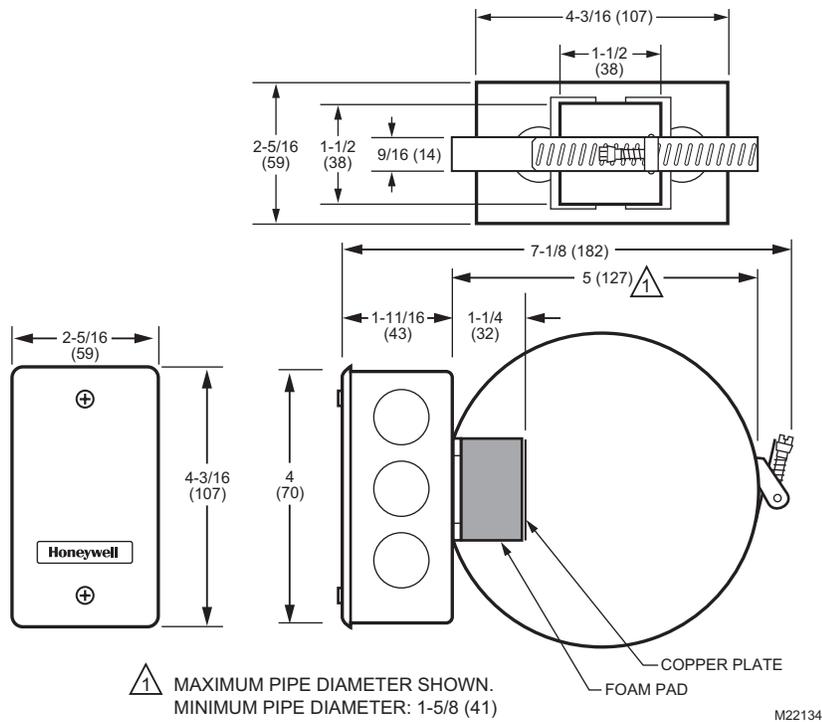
C7021K, C7023K, C7041K dimensions in in. (mm).
